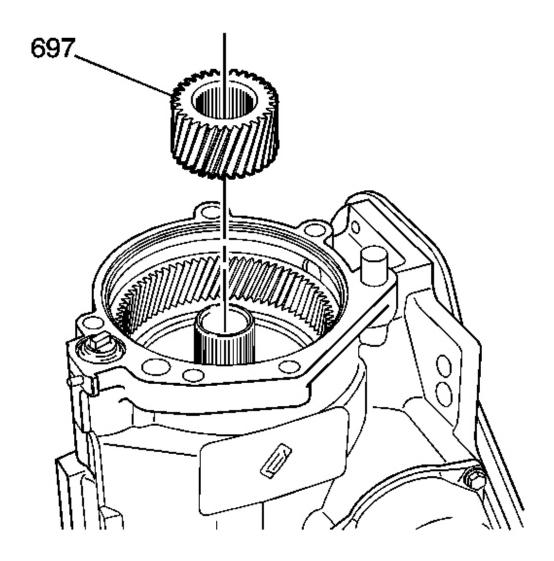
Locating Final Drive Sun Gear Courtesy of GENERAL MOTORS CORP.
